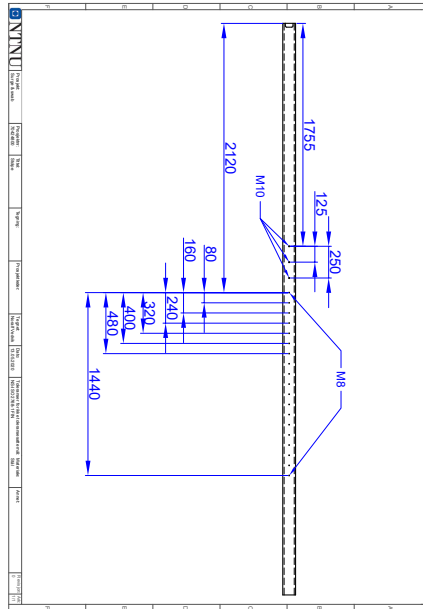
Guide rail for guide block to which the linear motor and drillstring is attached. Courtesy of Vedvik, 2020
